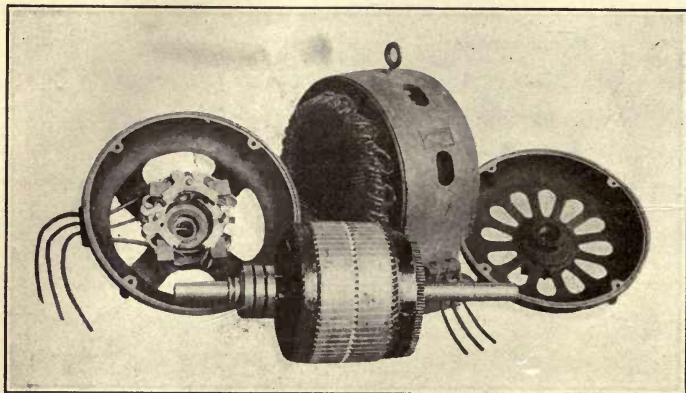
A LARGE A. C. POWER MOTOR DISASSEMBLED TO SHOW DIFFERENT PARTS. (SLIP RING TYPE.)
